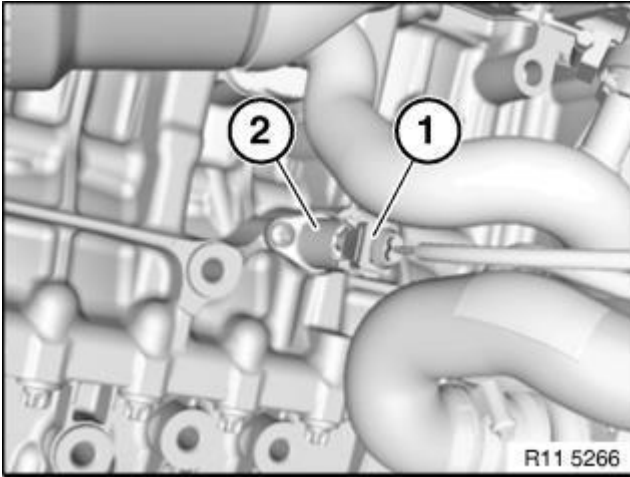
Detach Plug (1) From Hydraulic Valve (2)
